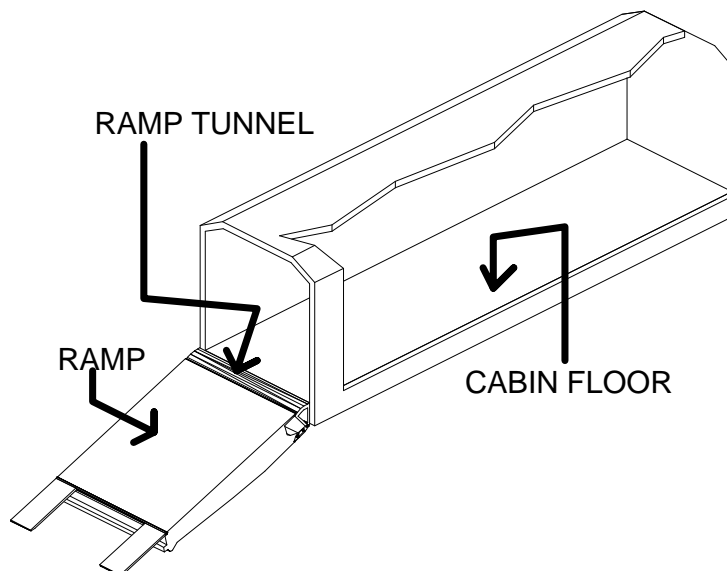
Travel Path In Order to Deploy/Stow Buffer Boards.
